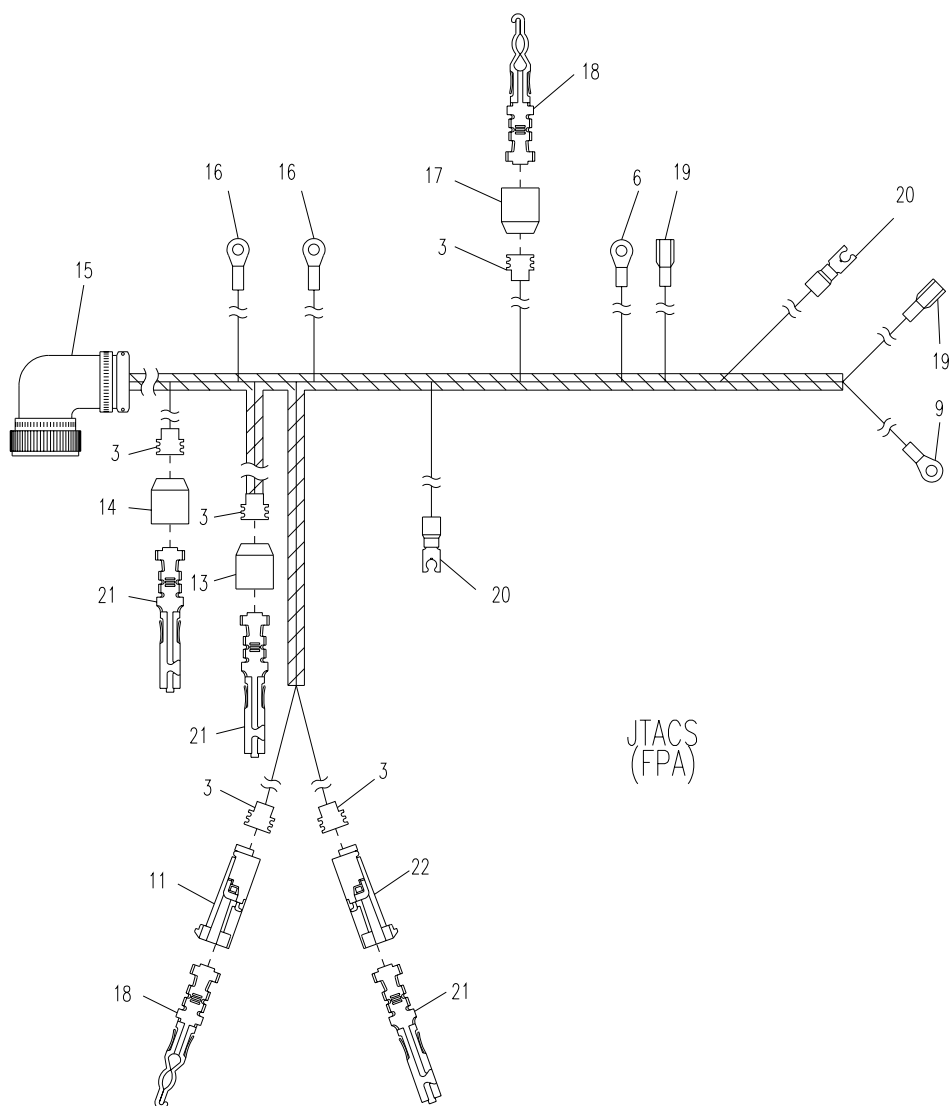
Wiring Harness, Engine, P1 (Sheet 1 of 3)
